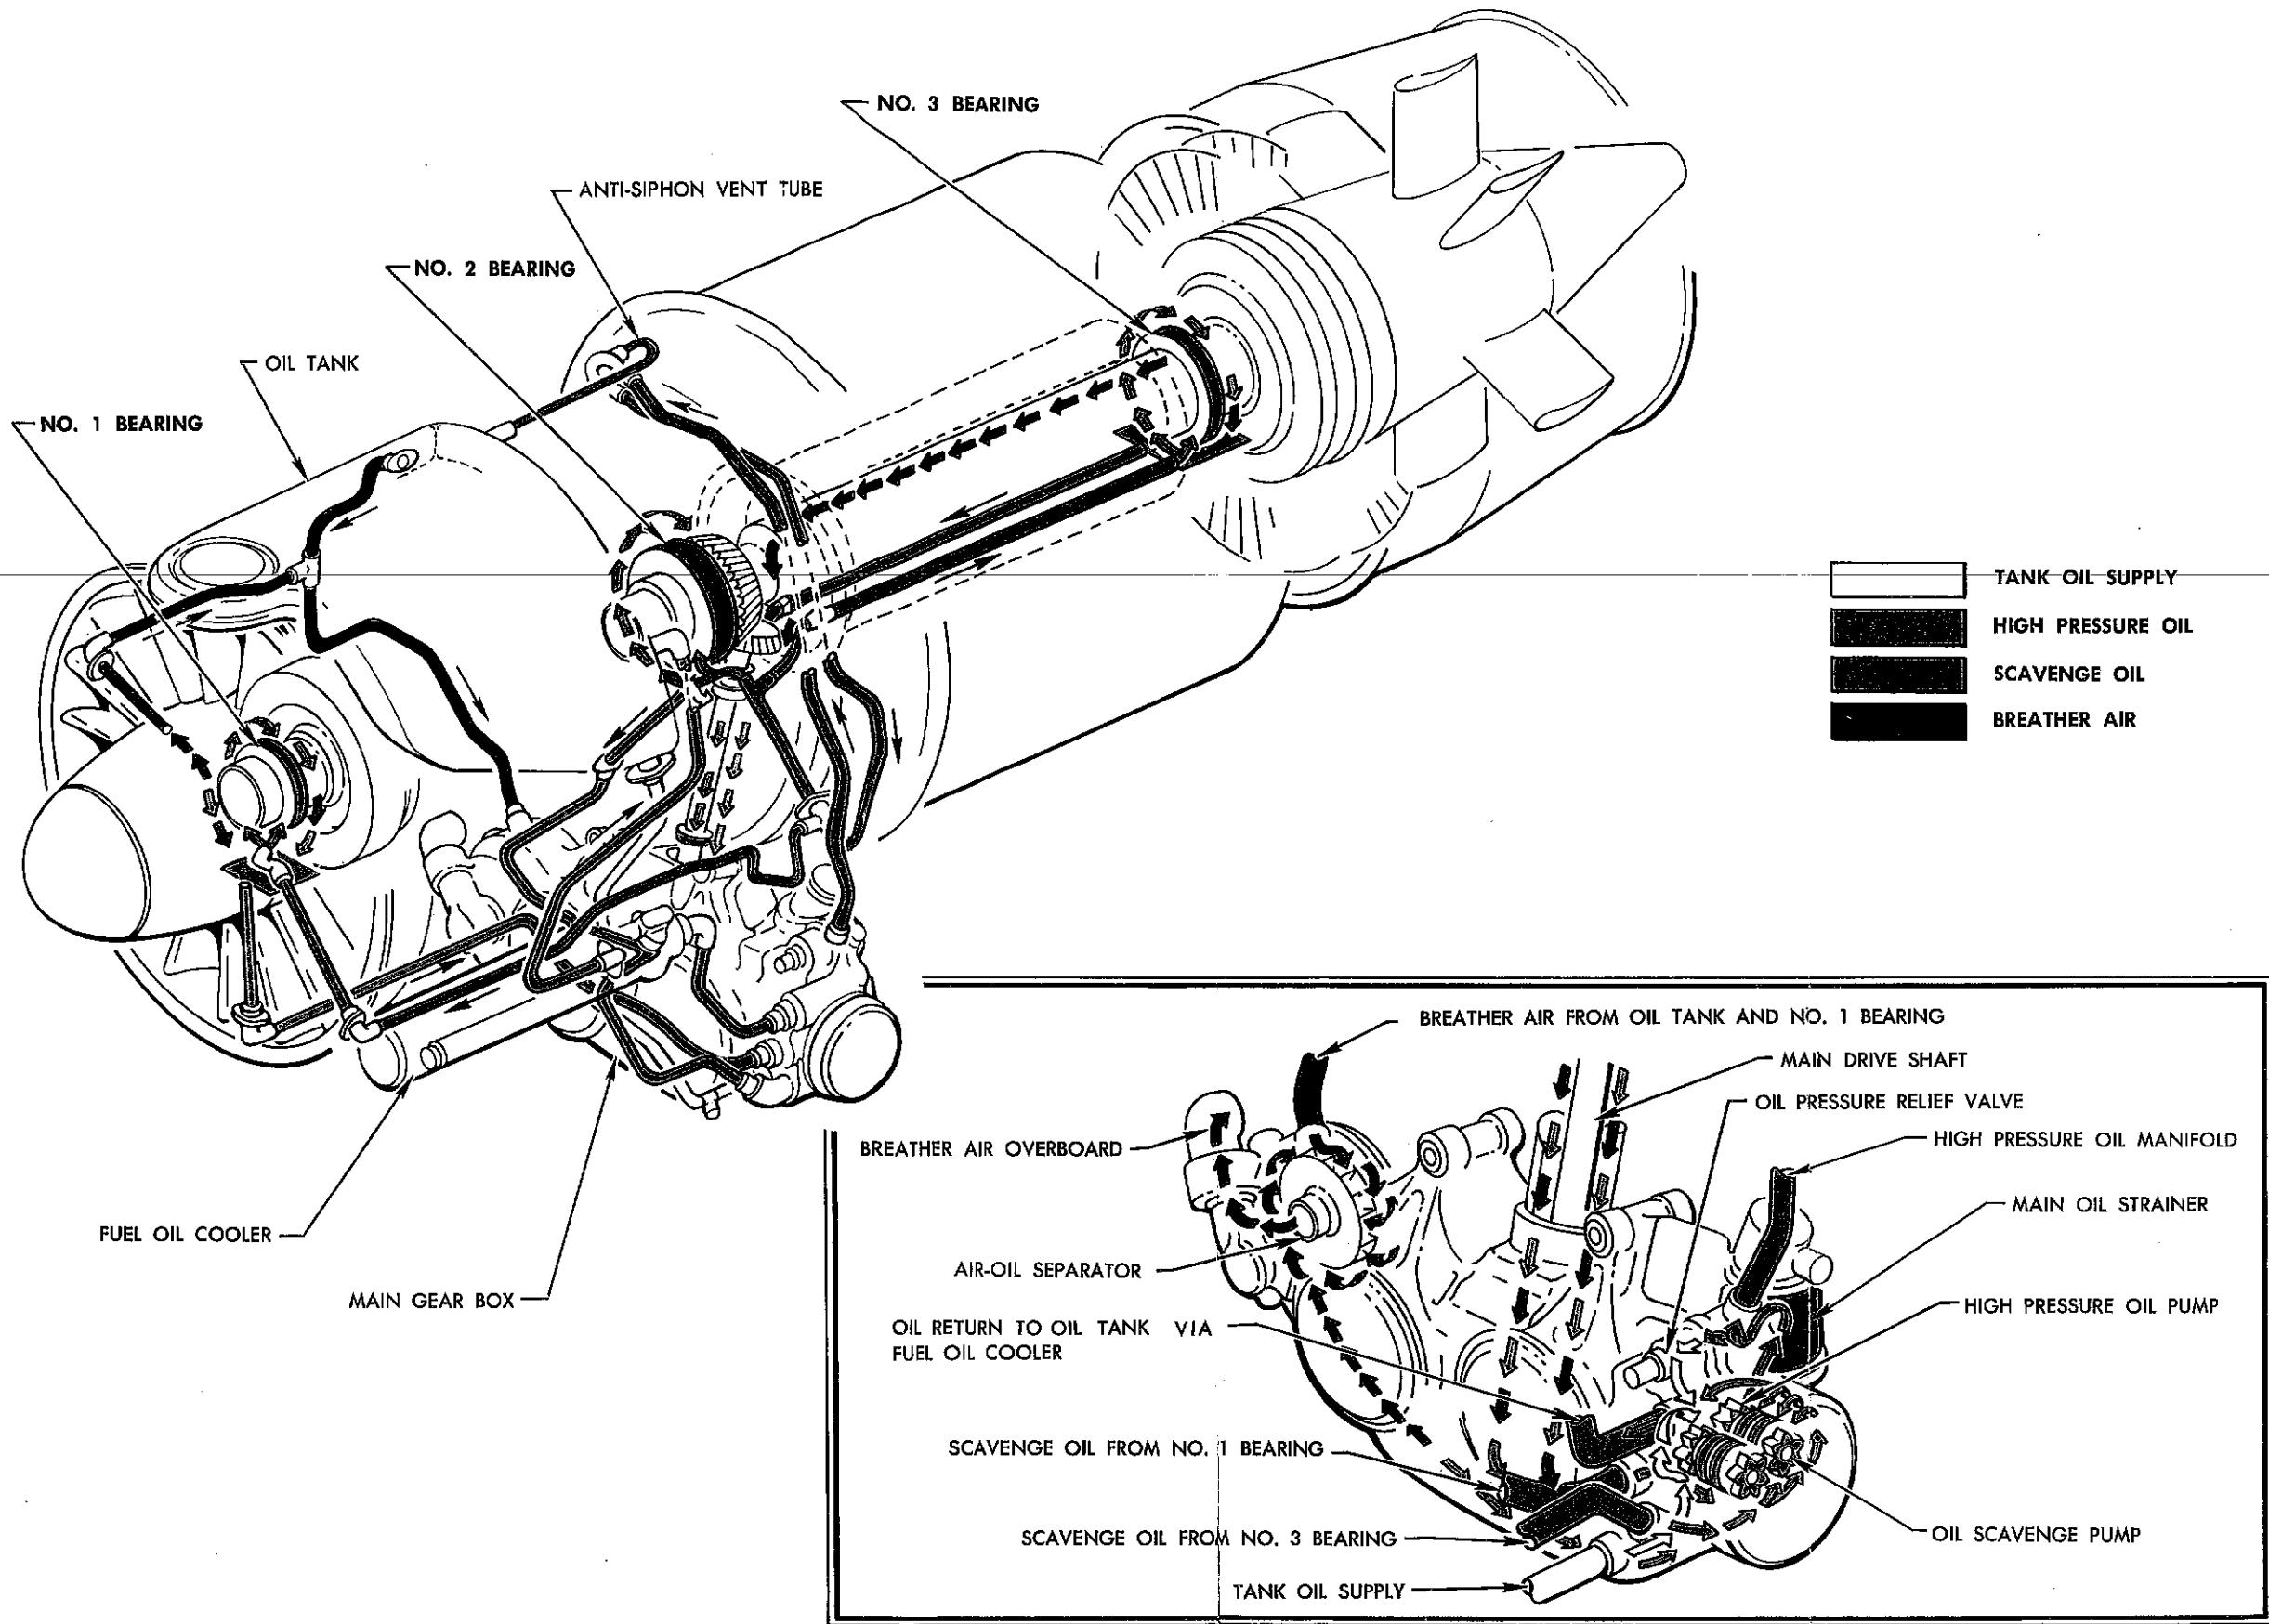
Turbojet Engine Lubrication System (Sheet 1 of 3)
